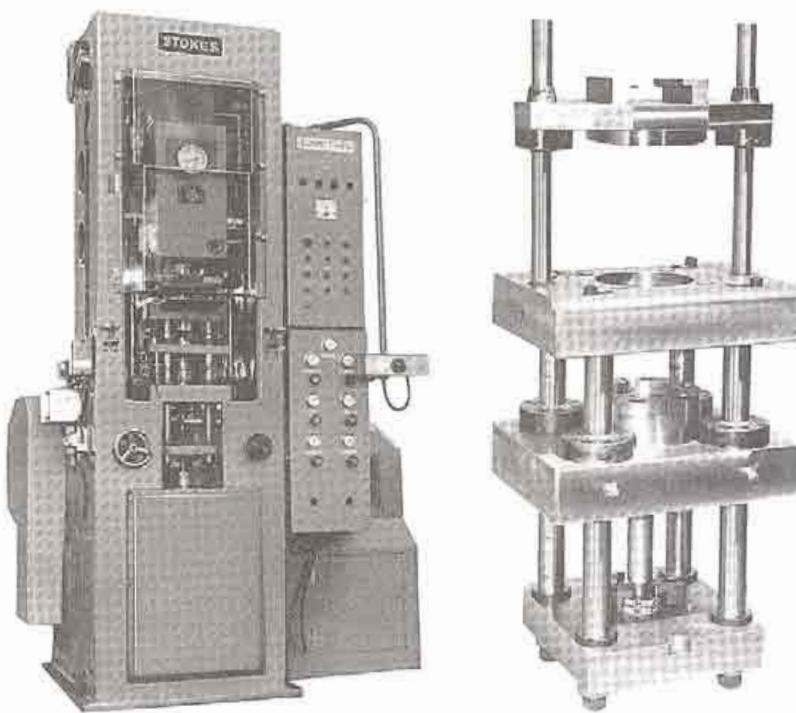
(Left) Typical press for the compacting of metal powders. A removable die set (right) allows the machine to be producing parts with one die set while another is being fitted to produce a second product. (Courtesy of Alfa Laval, Inc., Warminster, PA.)
